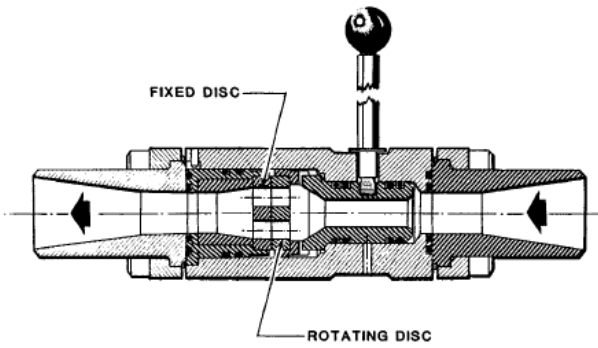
Rotating disc choke. (Courtesy of Willis Control Division, Cameron Iron Works, Houston.)
